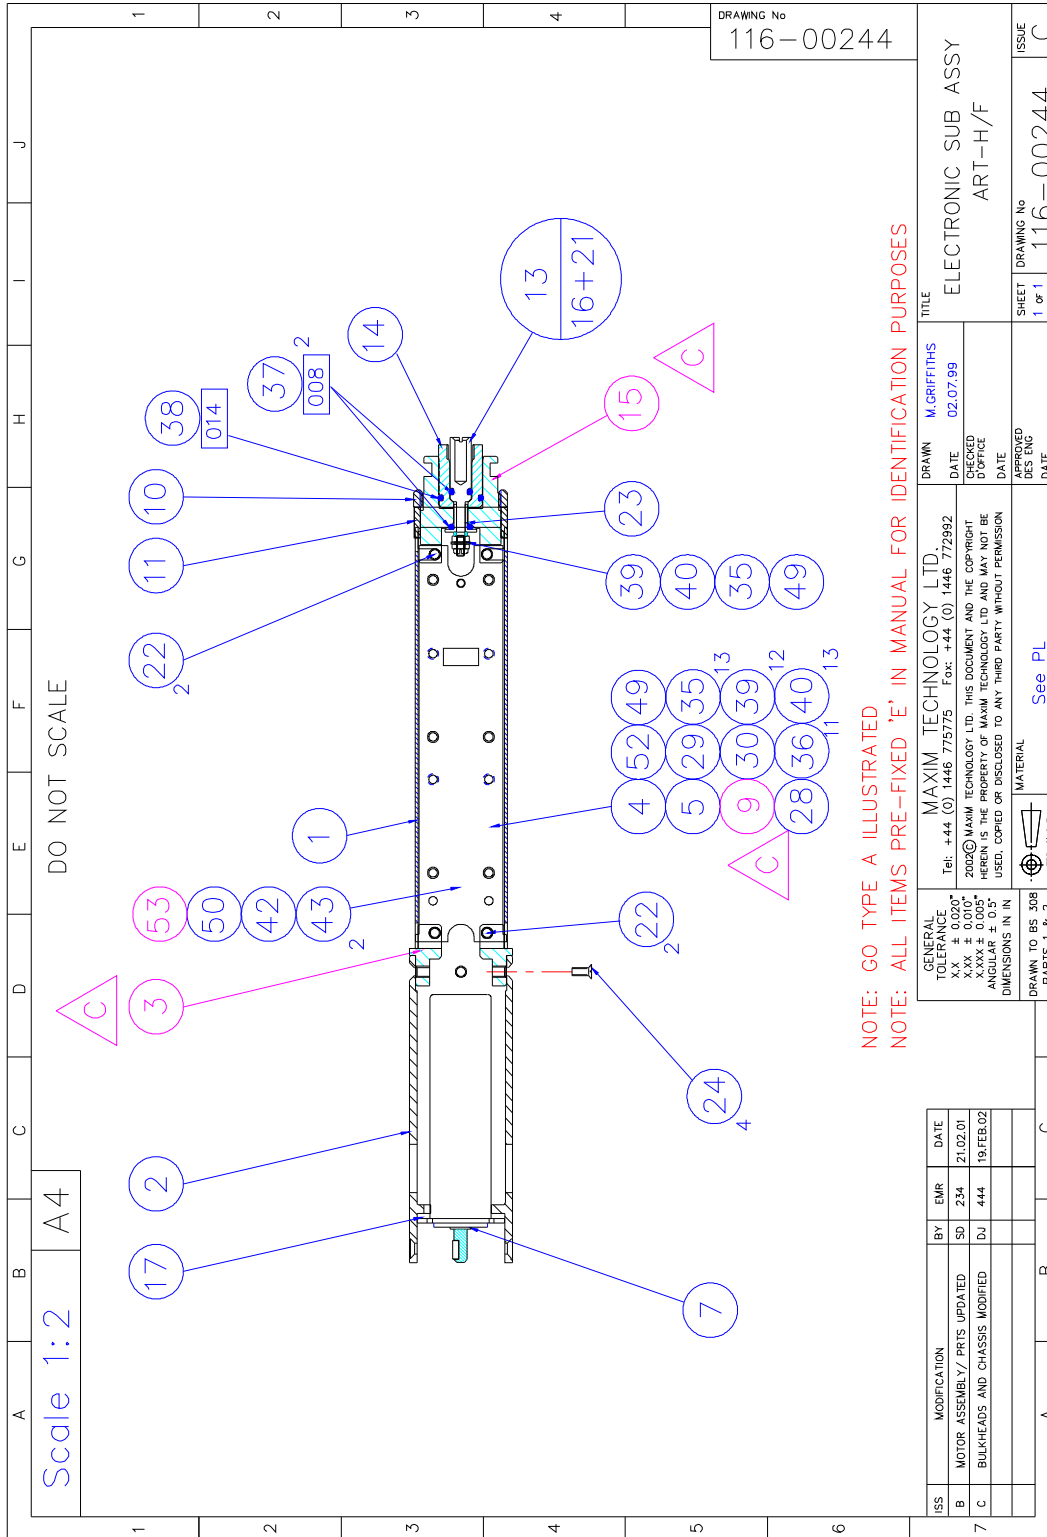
Assembly Drawing, Electronics, ART-H/F – 116-00244-C
